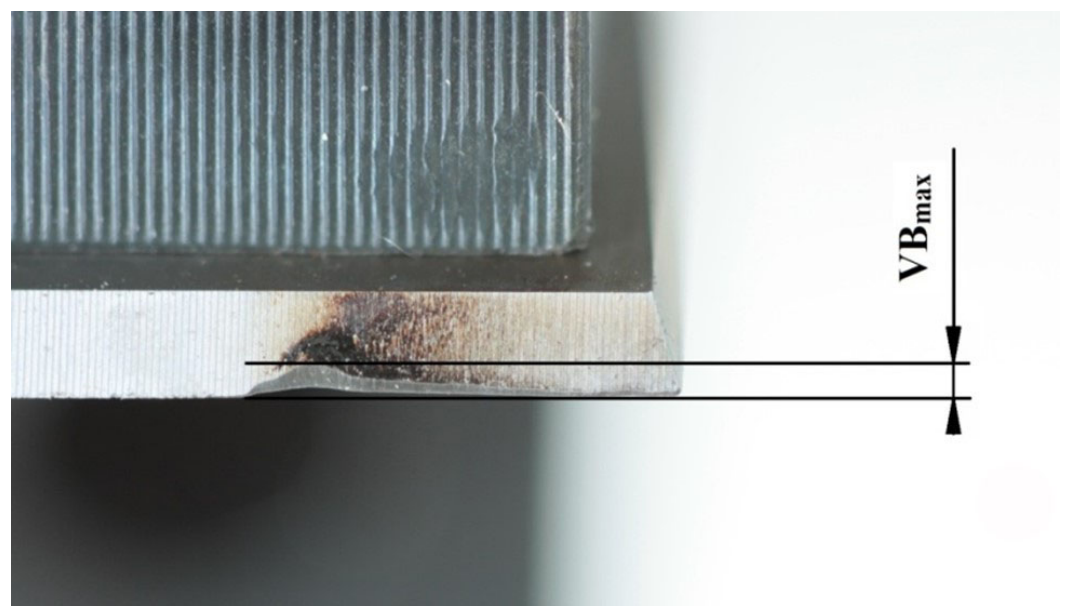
Illustration of tool wear measurement using the VB_{max} parameter.
